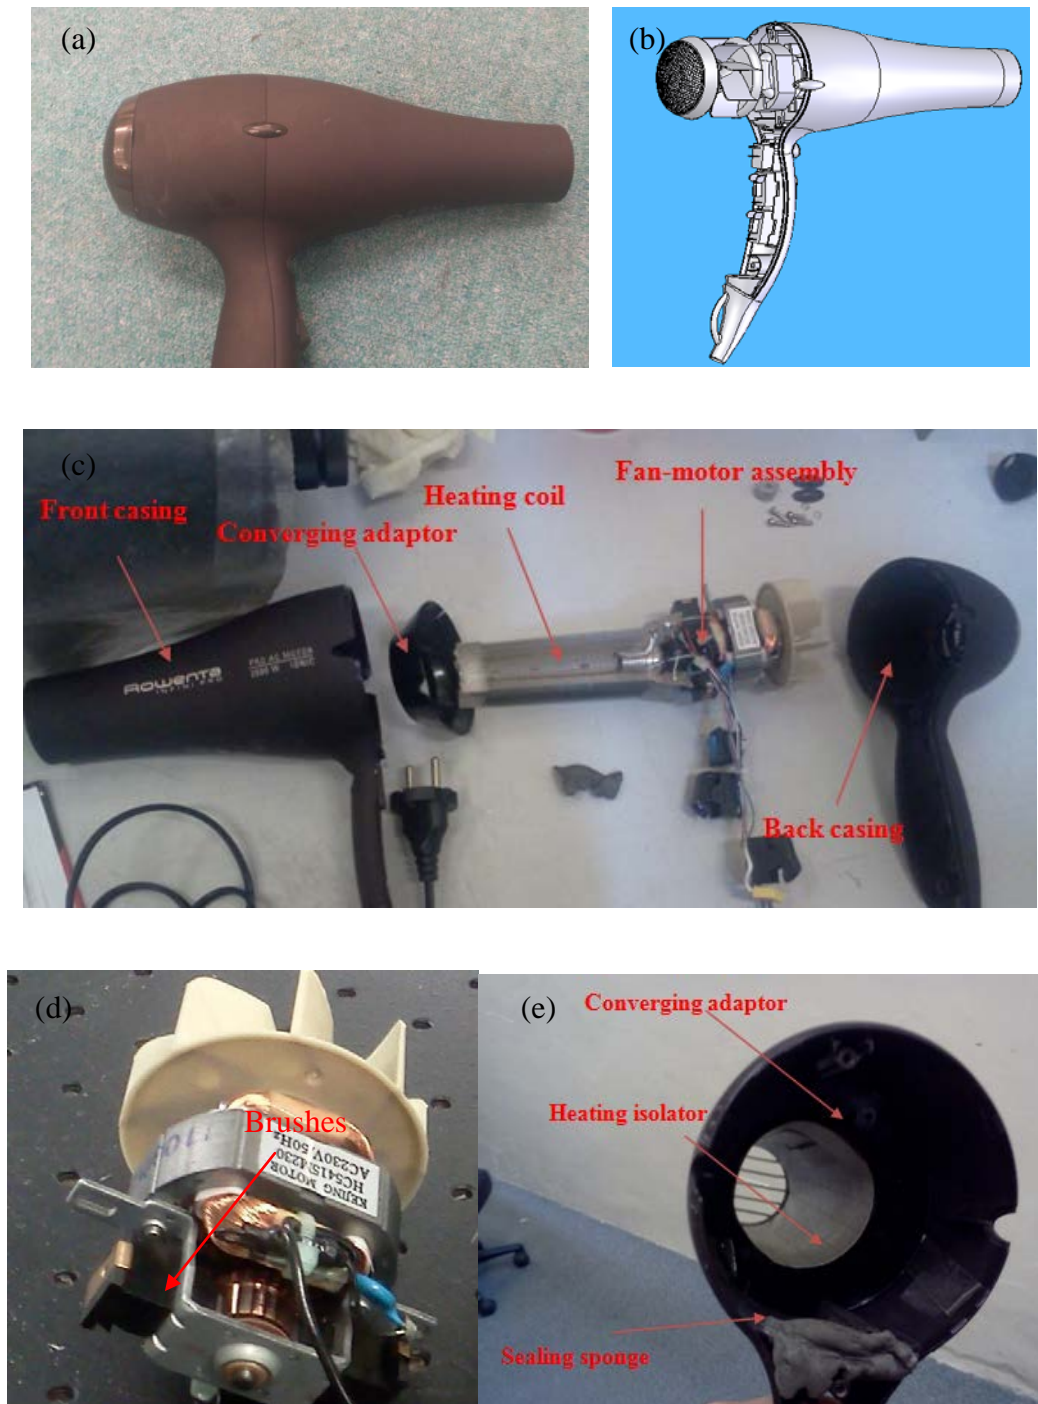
Configuration of hairdryer. (a) Hairdryer of model no. 768, (b) CAD drawing showing internal components, (c) photo of hairdryer components and (d) details of motor-fan assembly with brushes and (e) inner part of the front enclosure
